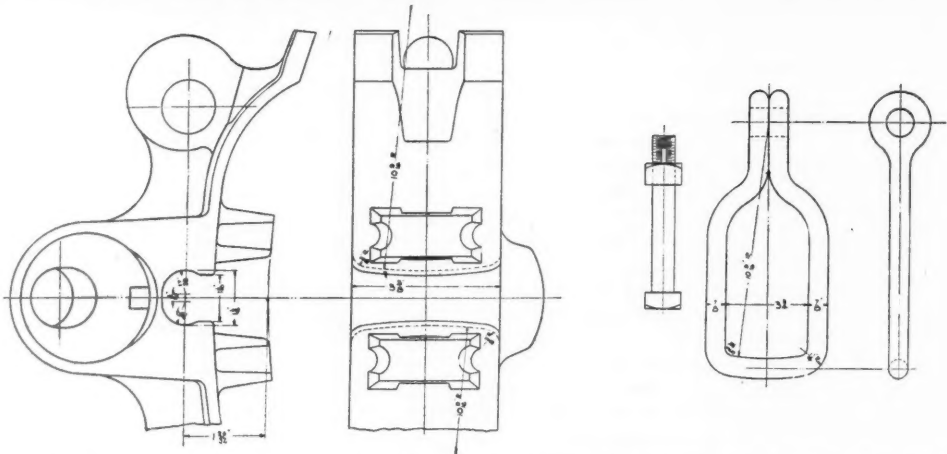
Recommended M. C. B. Standard Brake Head and Shoe, Brake-Shoe Key and Brake-Head Gage.
